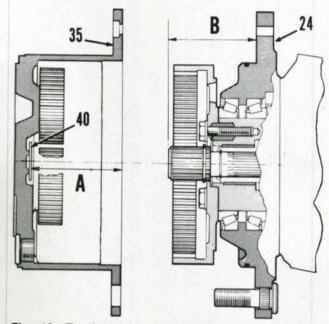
To determine axle shaft end play, measure distance A and B and refer to text. Thrust washer (40) is available in various thicknesses to adjust end play.
